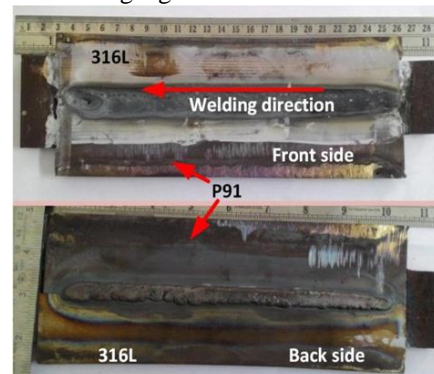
Image shows the front and back side of the dissimilar metal joint weldments
